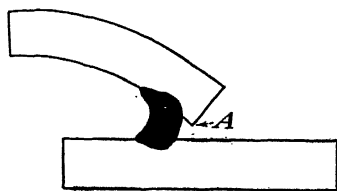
Fillet weld with poor penetration in throat: A indicates unbroken edge of vertical plate.
